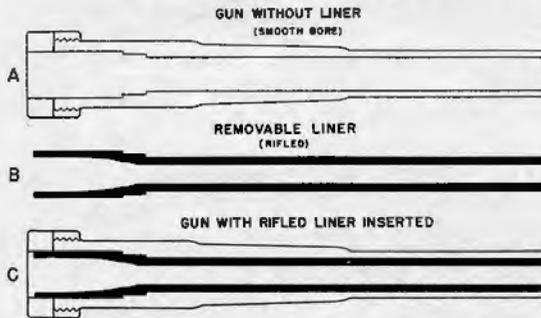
Cold-worked gun with removable liner, 3-inch, caliber .50 AA gun.
